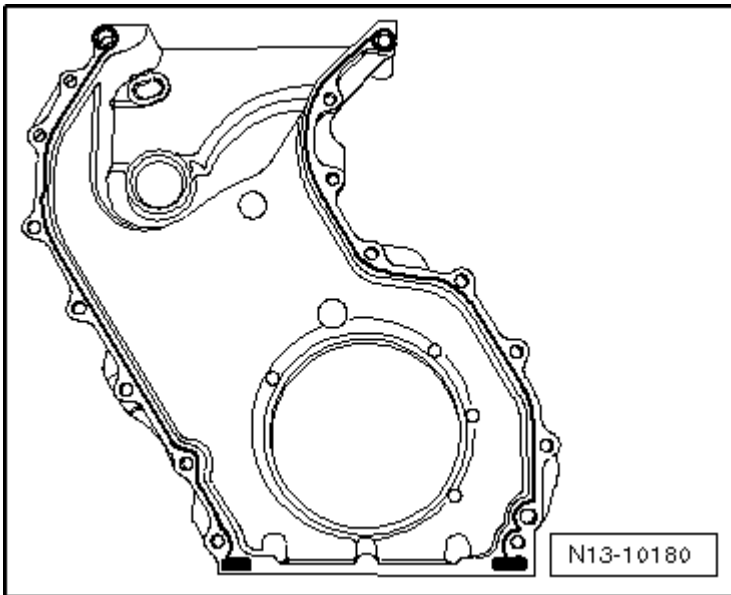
Applying Sealant On Clean Sealing Surfaces Of Sealing Flange
